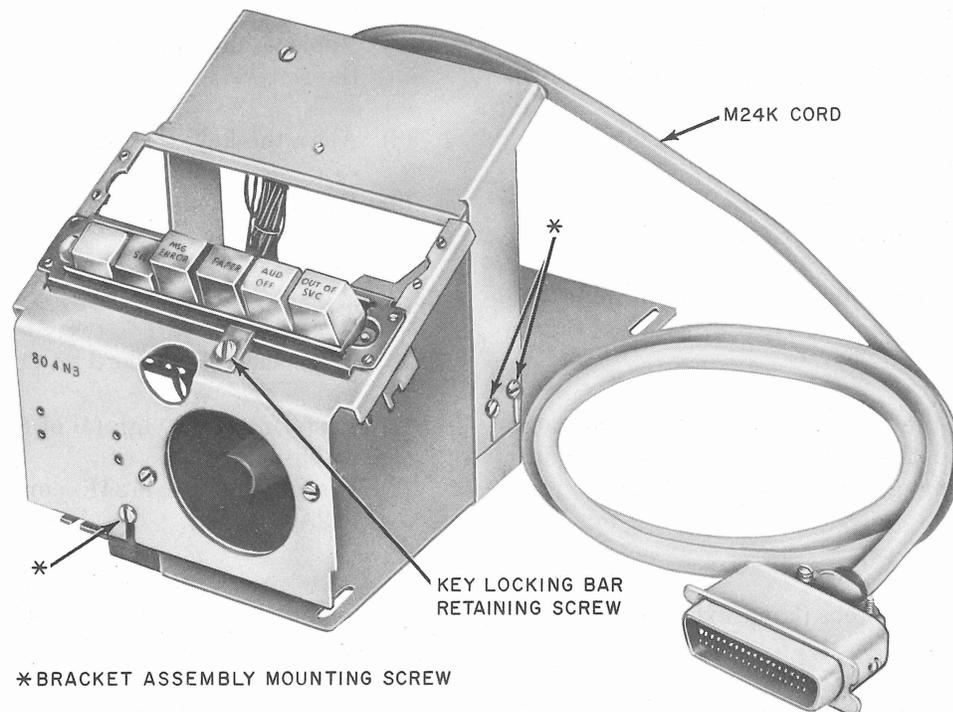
DAS 804N3 Showing the Mounting Screws and Key Retaining Screw
